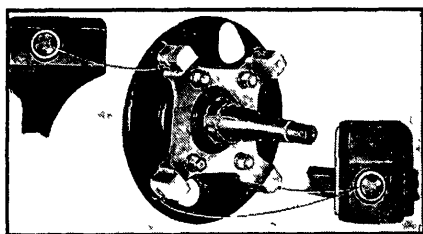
Installing dust shield and spider. Chrysler left front disc brake
